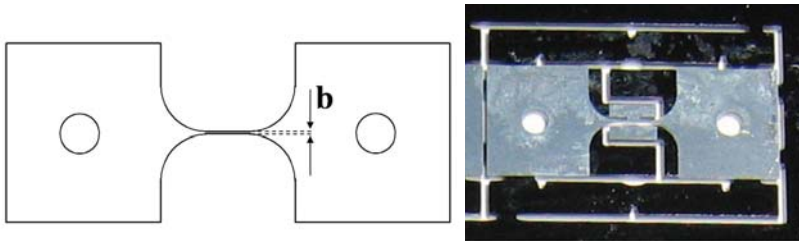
Micro-tensile test specimens: schematic illustration and picture.
